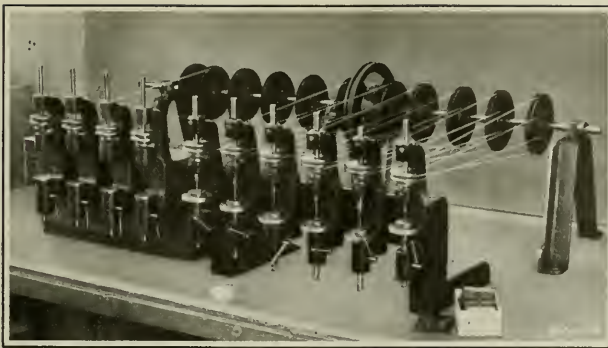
Multiple-spindle Machines for bell-mouthing both Ends of the Tapered Drawing Hole
